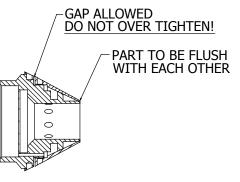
RPM-79 and RPM-80 Assembly (30mm)
